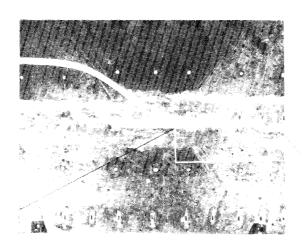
VIEW OF FRACTURED SPECIMEN C-IA SHOWING LOCATION
